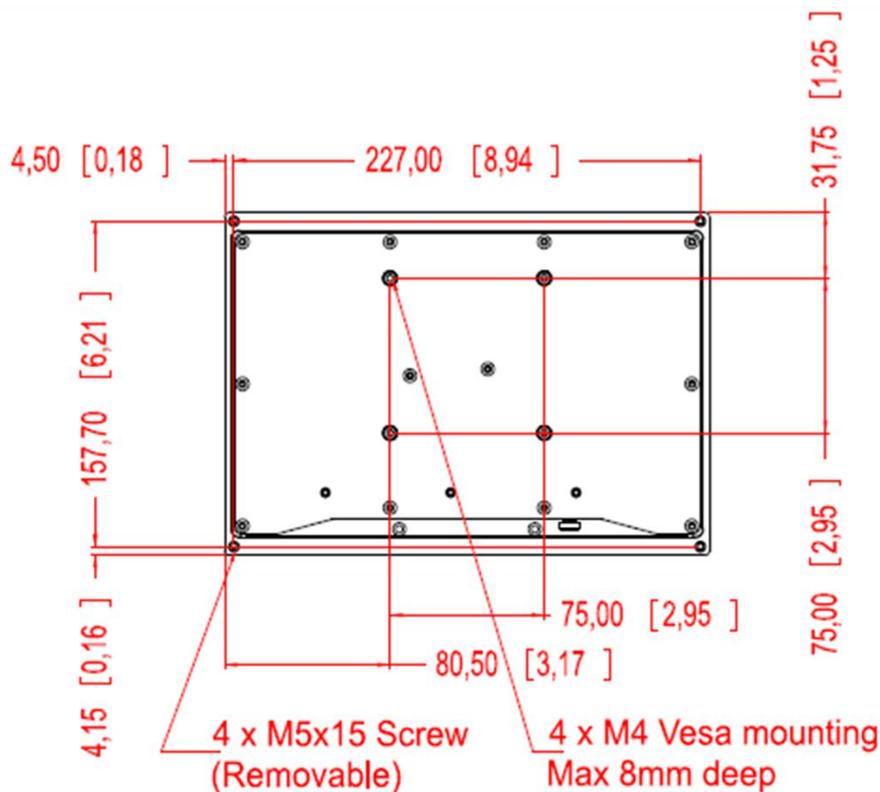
TSM800C VESA Arm Mounting Retention Screw Holes
